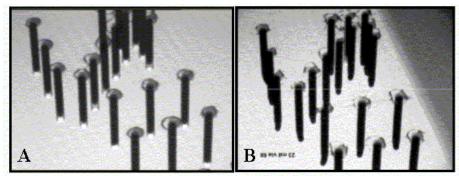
X-ray Results of (A) a Partial Fill, and (B) the Over-fill Achieved Using the Enclosed Print Head
